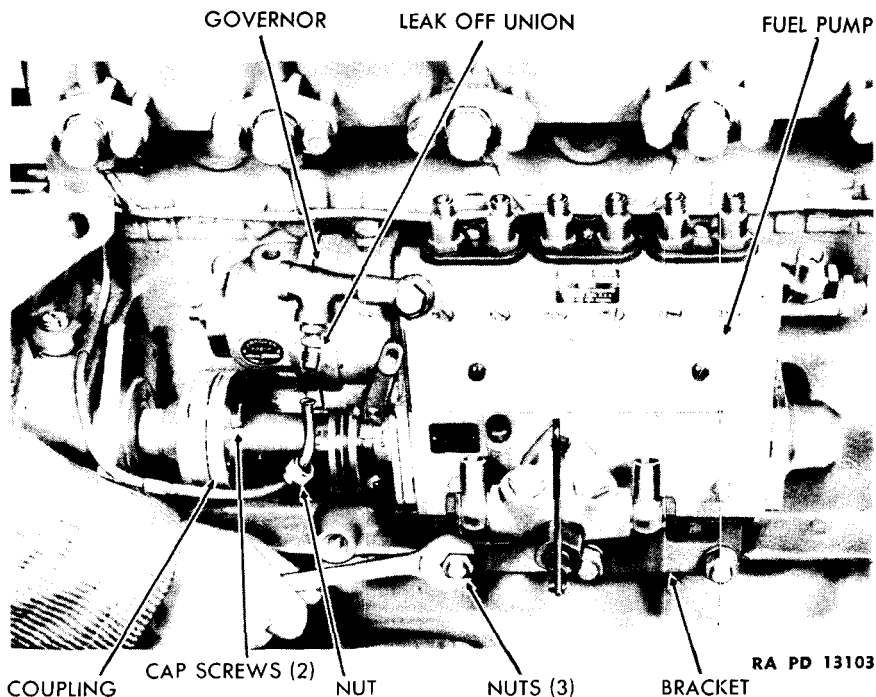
Removing Fuel Injection Pump and Governor - (Hercules Diesel)
